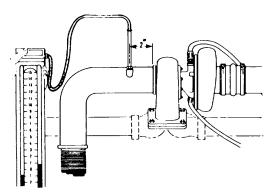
L-3. Checking the Exhaust Back Pressure 2. At the point selected, weld a 1/8 inch (3.2 mm) pipe coupling to the exhaust tubing. Drill through the tubing with a 1/8 inch drill. Remove all the burrs on the inside of the pipe and mount a 900 fitting to the coupling. Use 3 feet (0.9 mm) of 1/8 inch (3.2 mm) I.D. copper tubing (to resist the heat) plus 10 feet (3 m) of 3/16 inch (4.8 mm) I.D. soft rubber hose to manometer. The manometer can be mercury filled or water filled.
